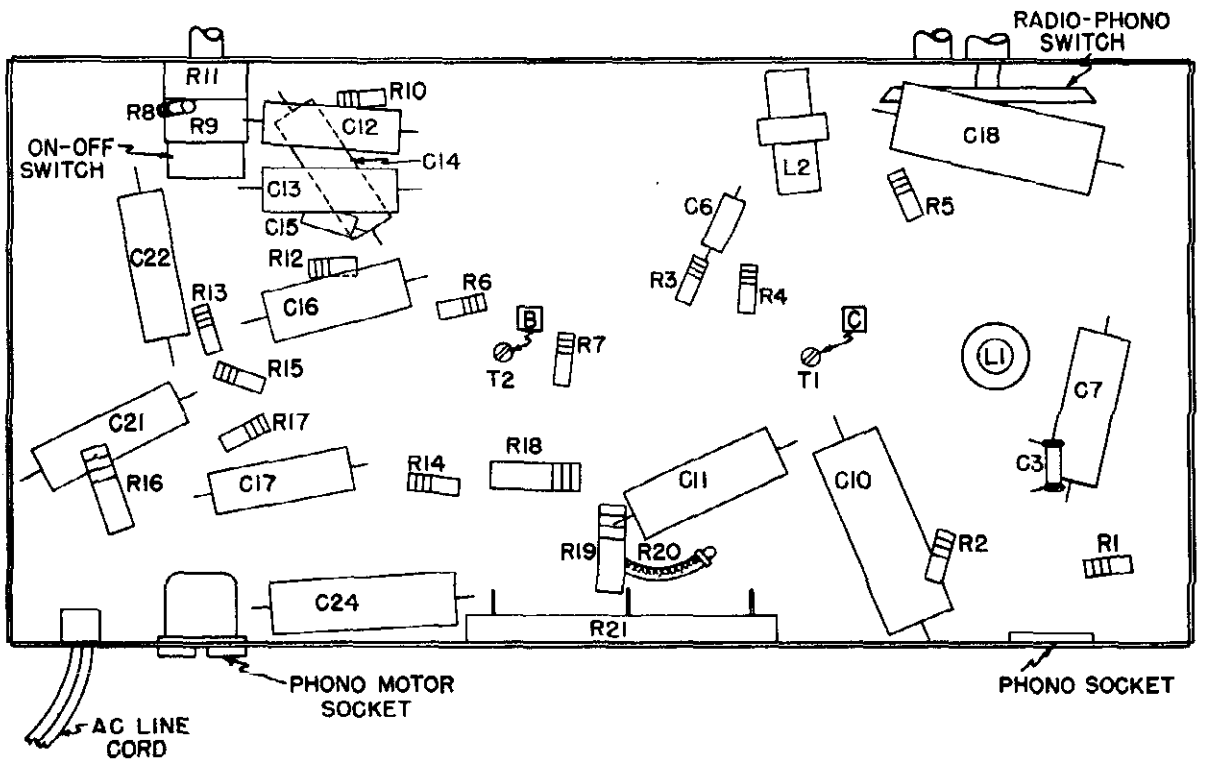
RADIO CHASSIS LAYOUT - BOTTOM VIEW
